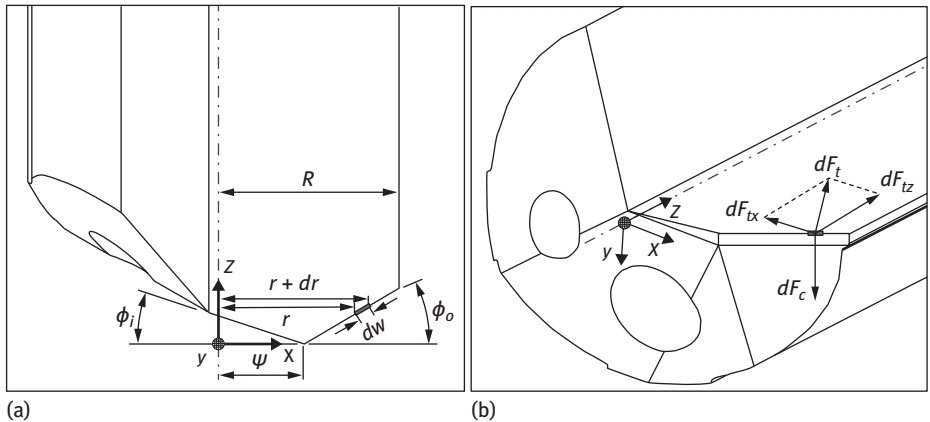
Cutting force generation on a gun drill. (a) Top view and (b) isometric view [1].
